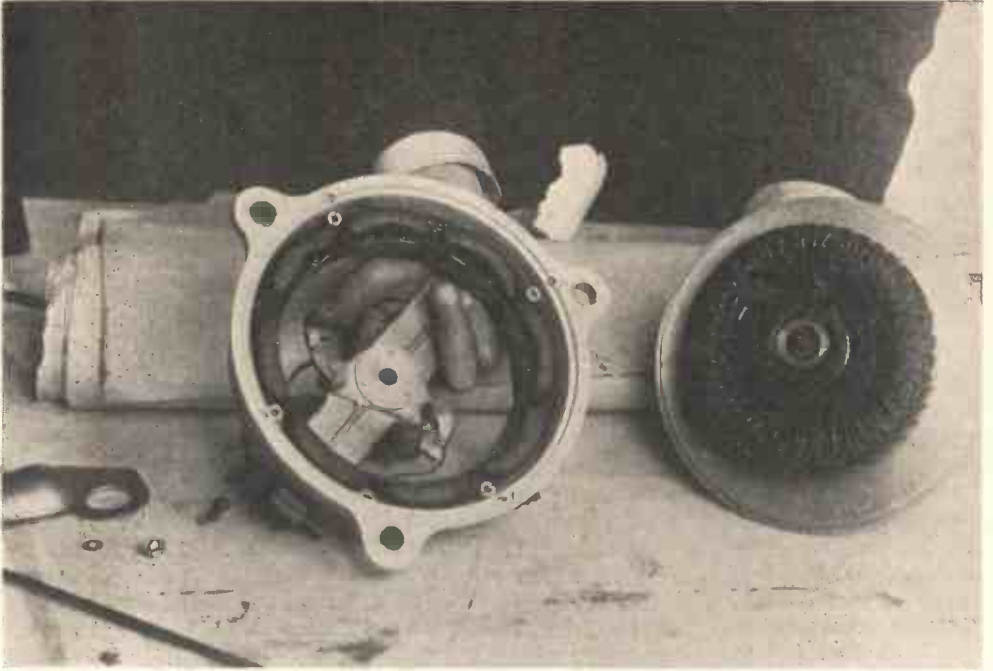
REMOVING THE TOP PLATE TO GET AT THE ARMATURE.
